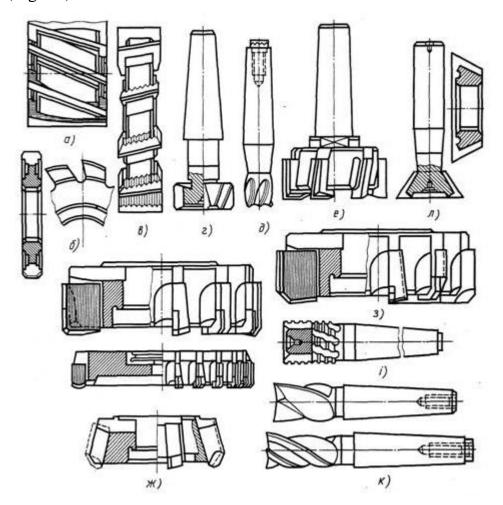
Basic types of mills: a-cylindrical; b-disc; in, Mr. T-shaped; d-finite; e-face with a shaft; z-end face; from-faces step-by-step; and-finely rusty; to-key; L-corner
